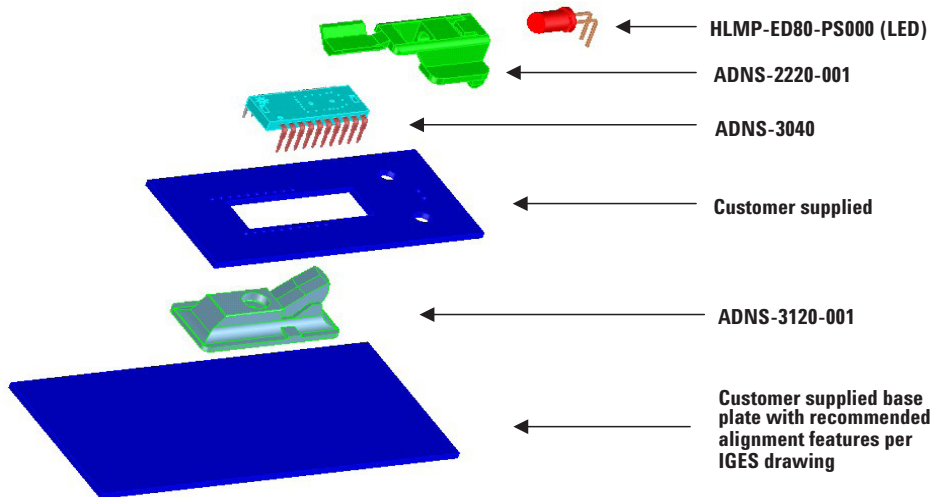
Exploded view of the ADNK-3040 optical tracking engine
